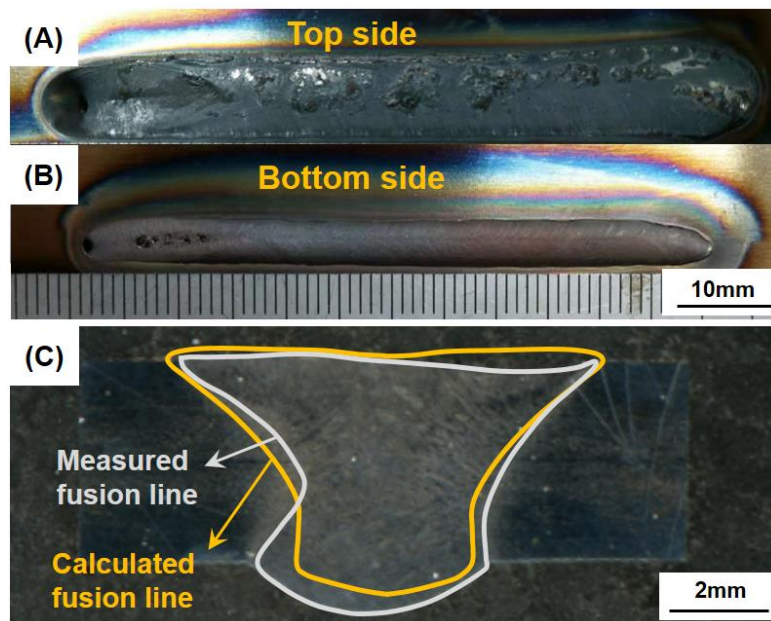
(A) Top surface of the weld bead; (B) Bottom surface of the weld bead; (C) Comparison of calculated and experimental weld profiles at the transverse cross section
